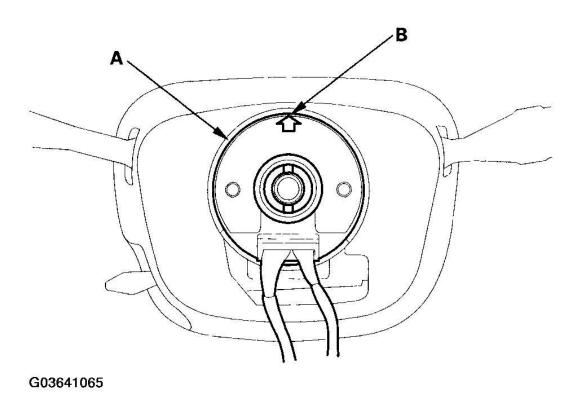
Identifying Arrow Mark On Cable Reel Label Point Courtesy of AMERICAN HONDA MOTOR CO., INC.
